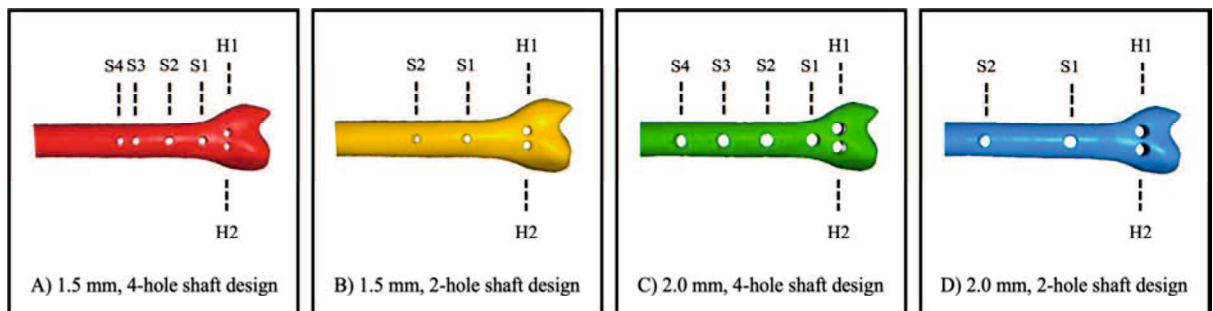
Screw-hole arrangement on each plate. Head screw hole 1 (H1), head screw hole 2 (H2), shaft screw hole 1 (S1), shaft screw hole 2 (S2), shaft screw hole 3 (S3), shaft screw hole 4 (S4).
